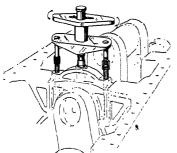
EXTRACTING MAIN BEARING CAPS FROM CRANKCASE.
